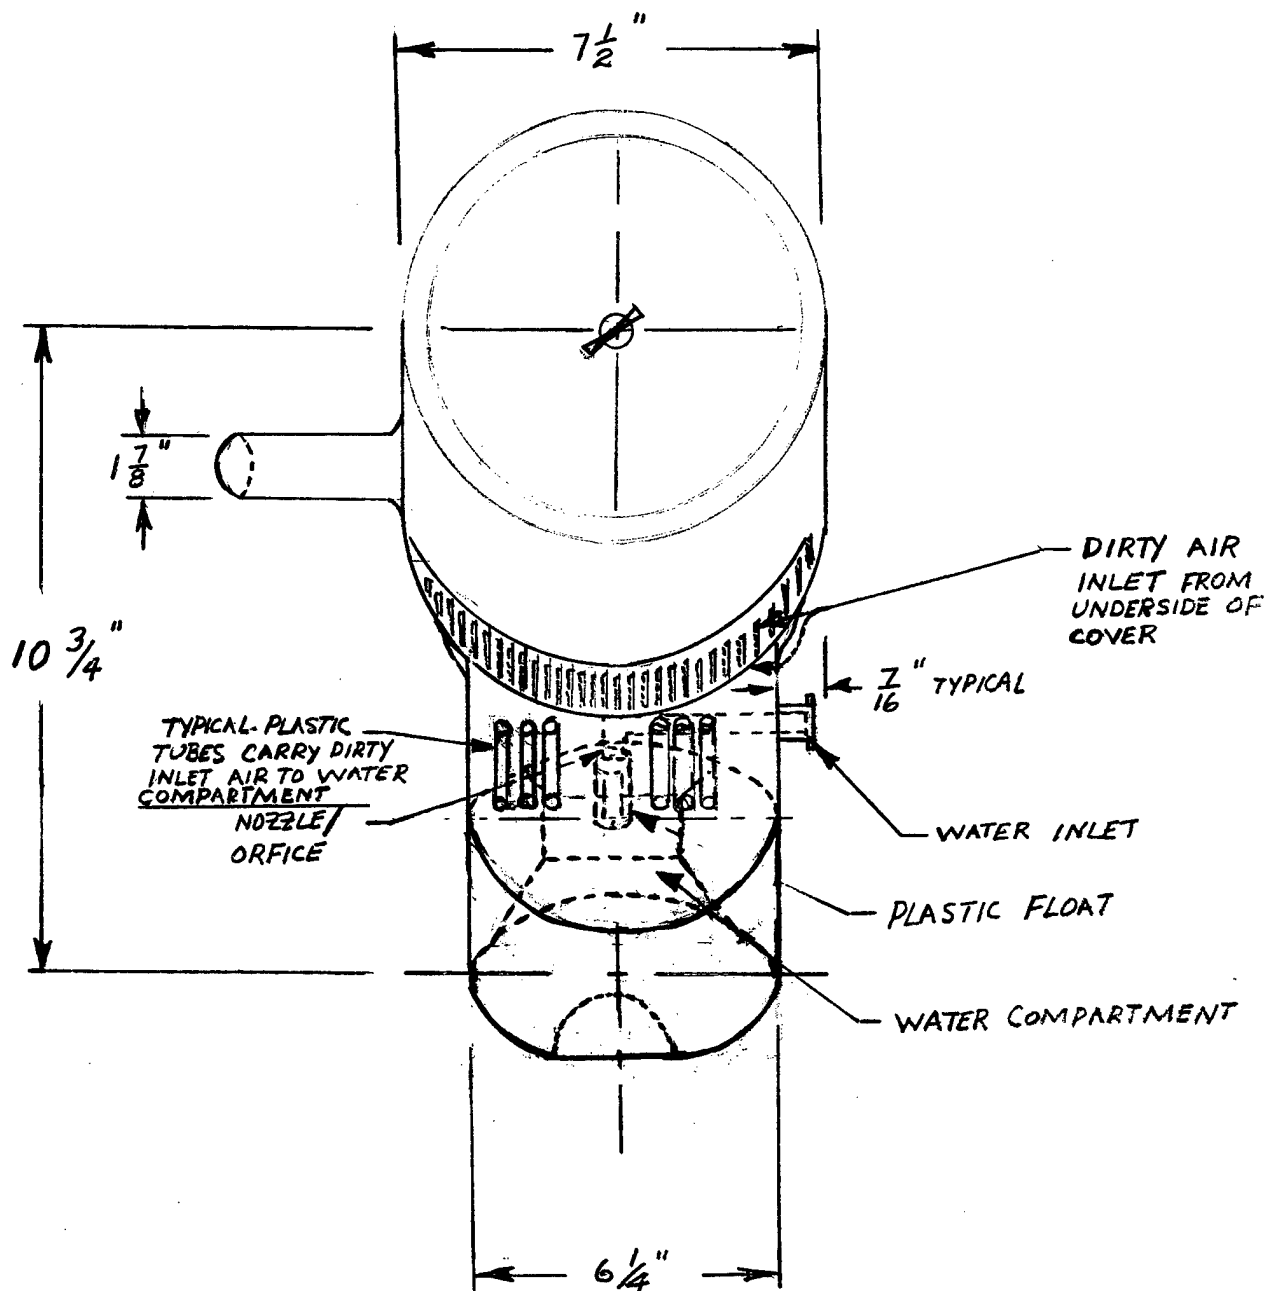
Sketch of FFCD-1 Water Air Filter Showing Overall Dimensions
